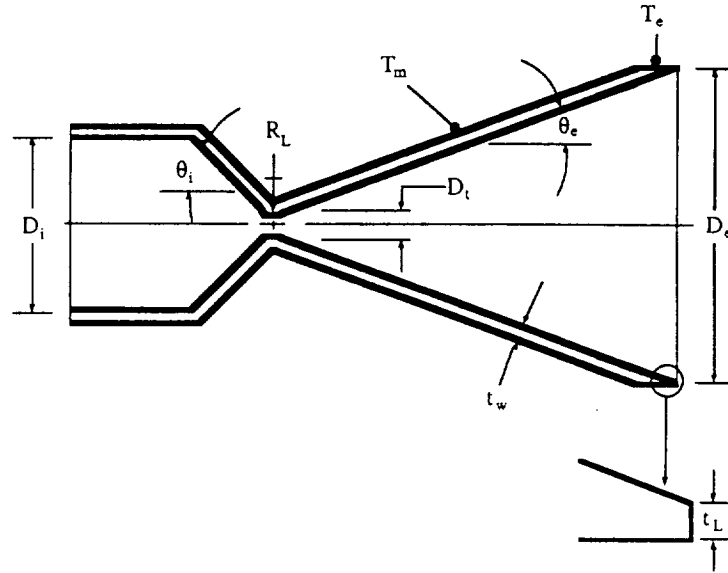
Converging and diverging control thruster nozzle diagram.
